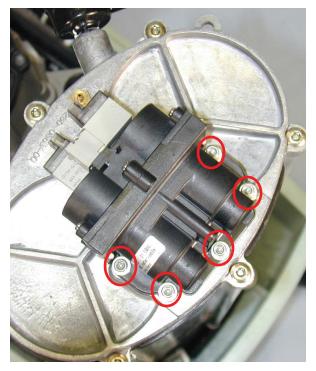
FIGURE AK: LOCATION OF THE SCREWS SECURING THE VALVE/SOLENOID ASSEMBLY
